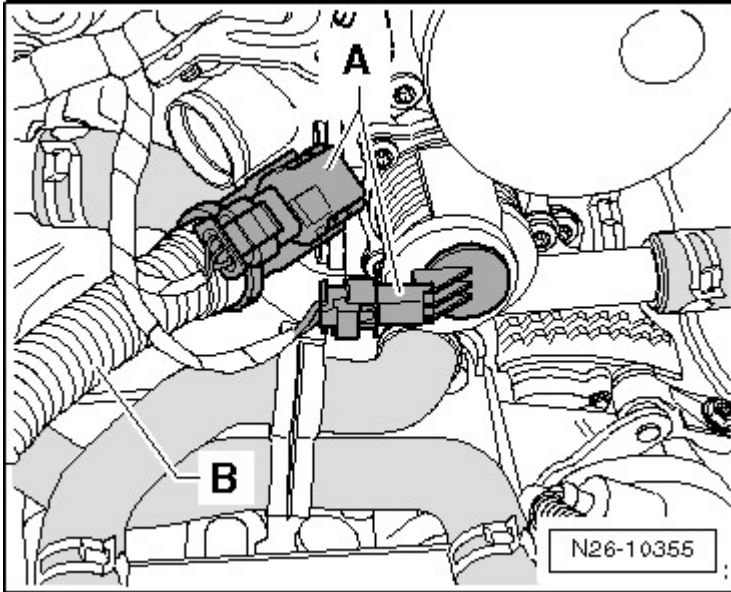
Identifying Vacuum Pump, Ground Cable, Electrical Connector And Coolant Hoses
